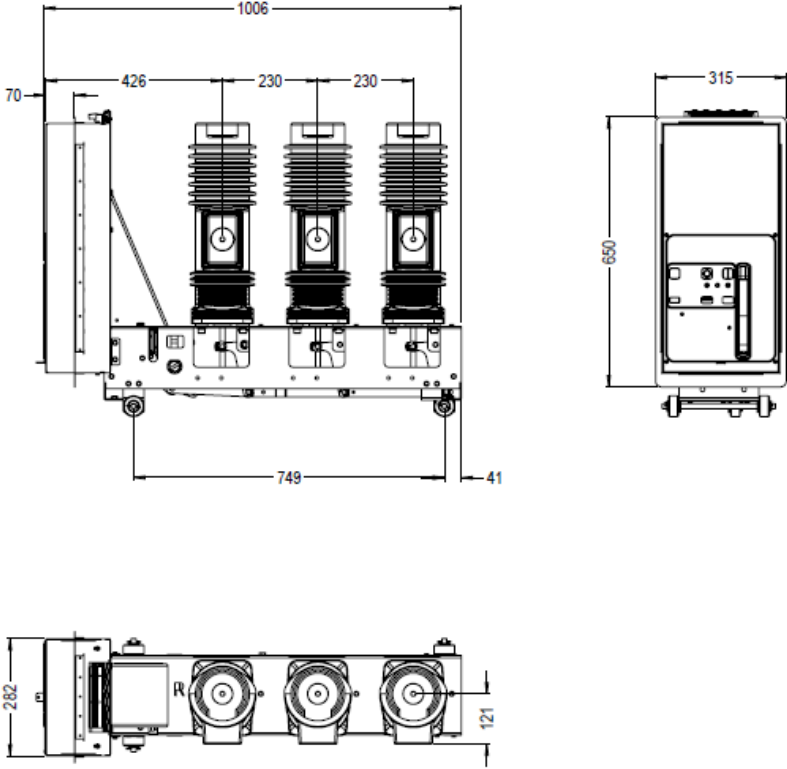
Overall dimensions VBWB-R241221/R240621.
